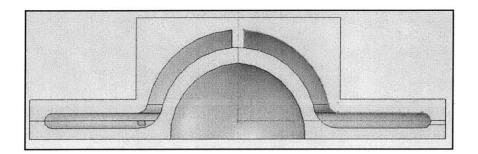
Cross-Section of Winged Dropper Popper Mold
